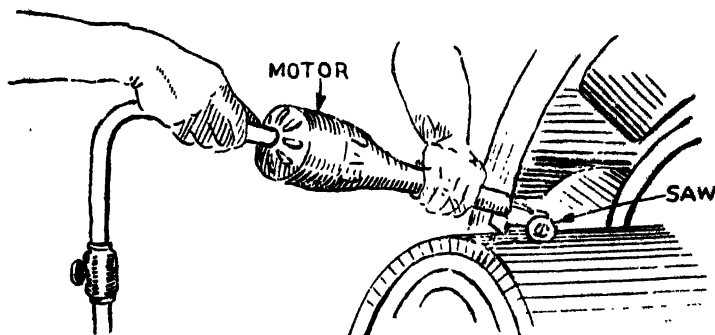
Rotary hand tool for undercutting mica and method of using. The saw is mounted between two handles and adjustable shoes are provided on each side so that the depth of the slot may be gauged and kept uniform. The saw may be driven by a small stationary motor through a flexible shaft or by a compressed air drill. In this case the armature is simply placed on a pair of V supports and clamped to prevent it turning if necessary.
